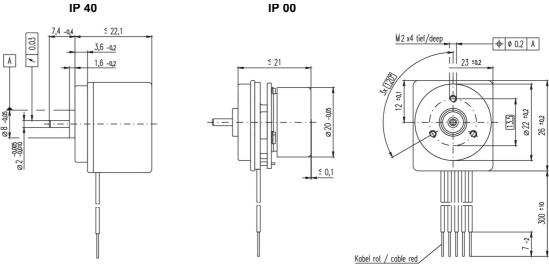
5 Watt Version – Dimensional Drawing [mm]
